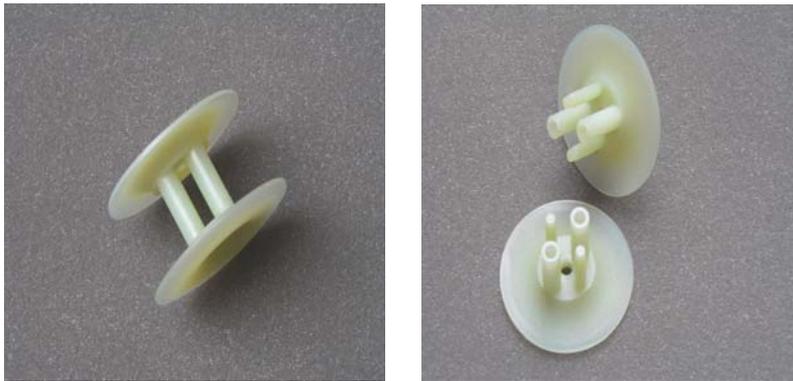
and 433. This bobbin is made as two identical halves in a mold with a simple parting line. The halves are then rotated 90° in relation to each other and then joined together by press-fitting.
